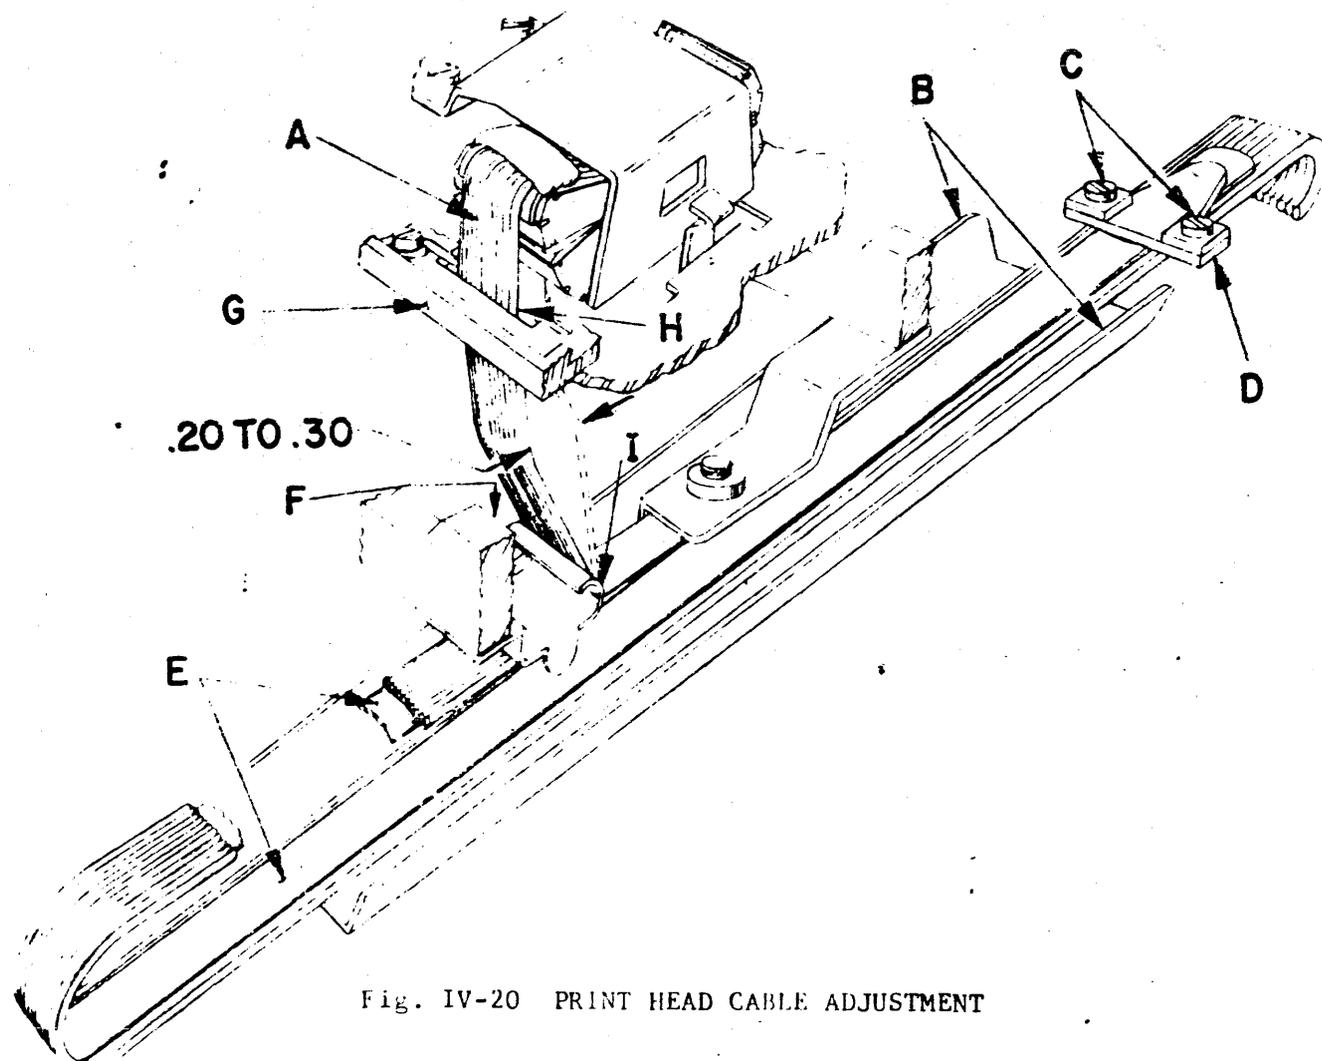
PRINT HEAD CABLE ADJUSTMENT
